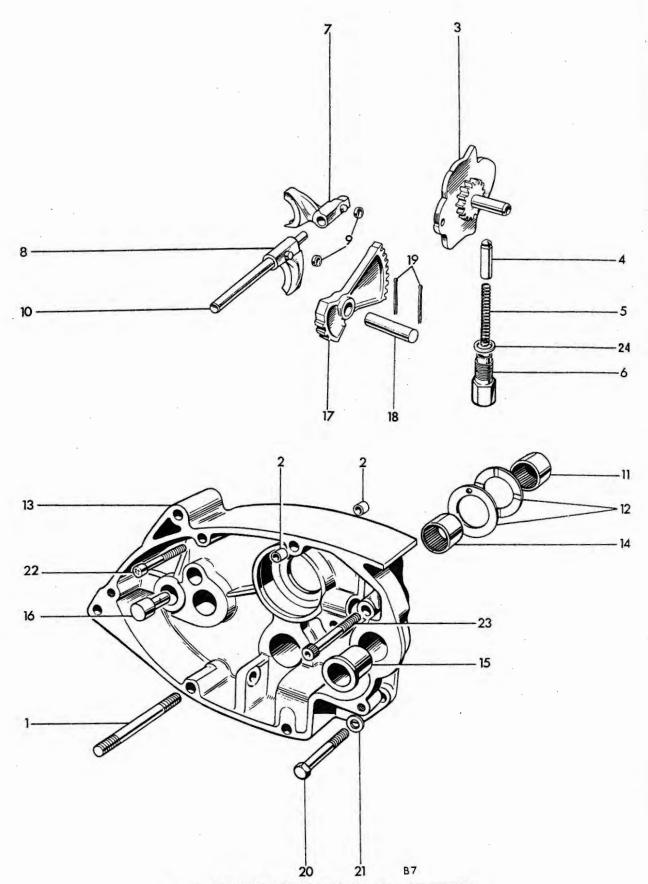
GEARBOX INNER COVER AND SELECTORS
